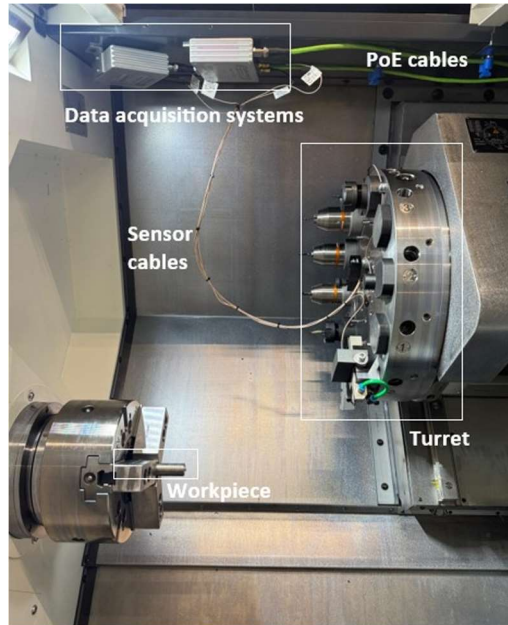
Setup on single-spindle turning machine DMG MORI CTX Alpha 500 at University of Augsburg
